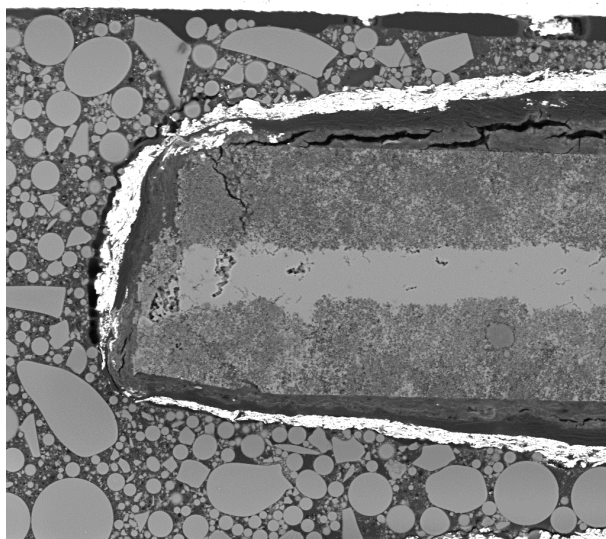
A SEM view of the cathode end cross-section. Cracks in the conductive polymer are due to high temperature storage of the part, but cracks in aluminum foil were likely formed during cutting of the foil.
